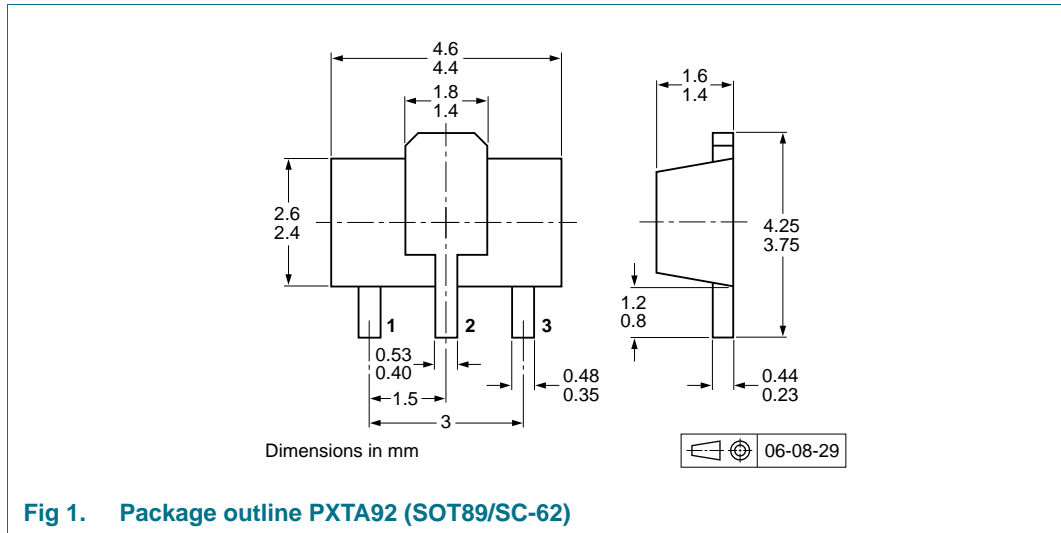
Package outline PXTA92 (SOT89/SC-62)
